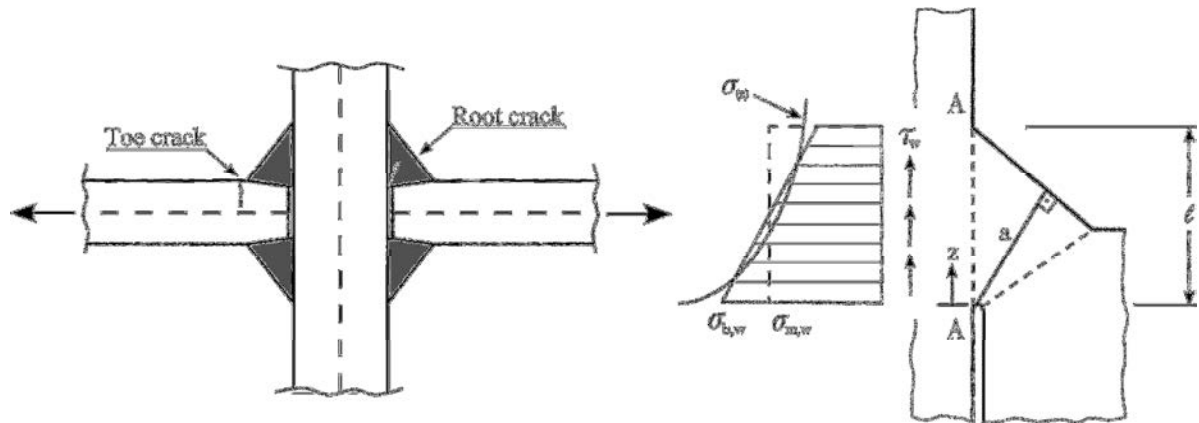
Possible fatigue cracks in cruciform joint with partial-penetration welds and linearization of the weld stress in the weld leg section [31]
